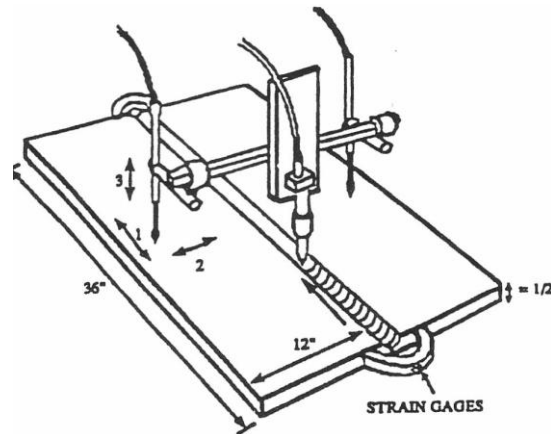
Welding setup with side heaters used by Chang to study the effectiveness of side heating on reducing rotational distortion [52]
